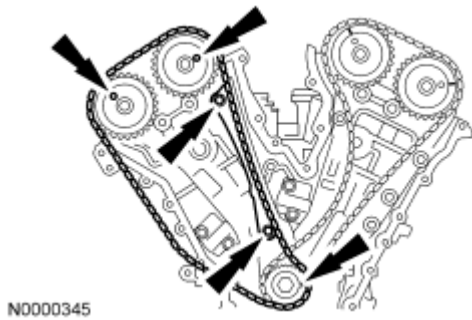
Aligning Marks On Timing Chain With Marks On Camshaft & Crankshaft Sprockets
